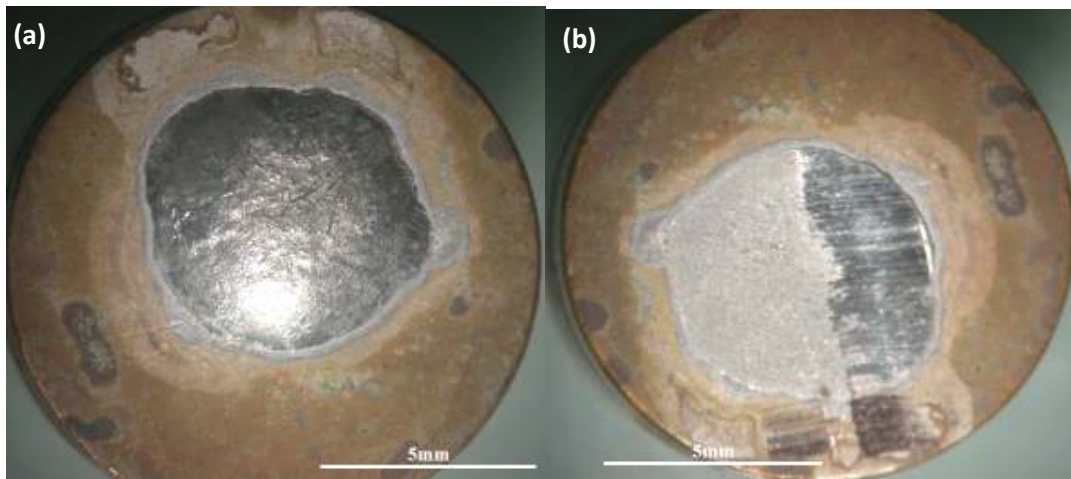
Macroscopic images (top view) of stabilized Sn-3Ag-0.5Cu solder on Cu substrate with Ag finish (a) before shear (b) after shear
